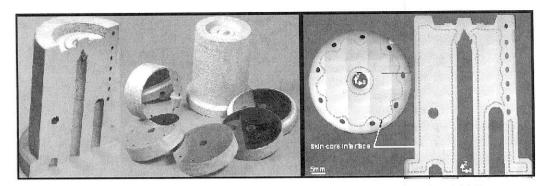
Additively manufactured skin-core tool insert (left), cross sections (right)
